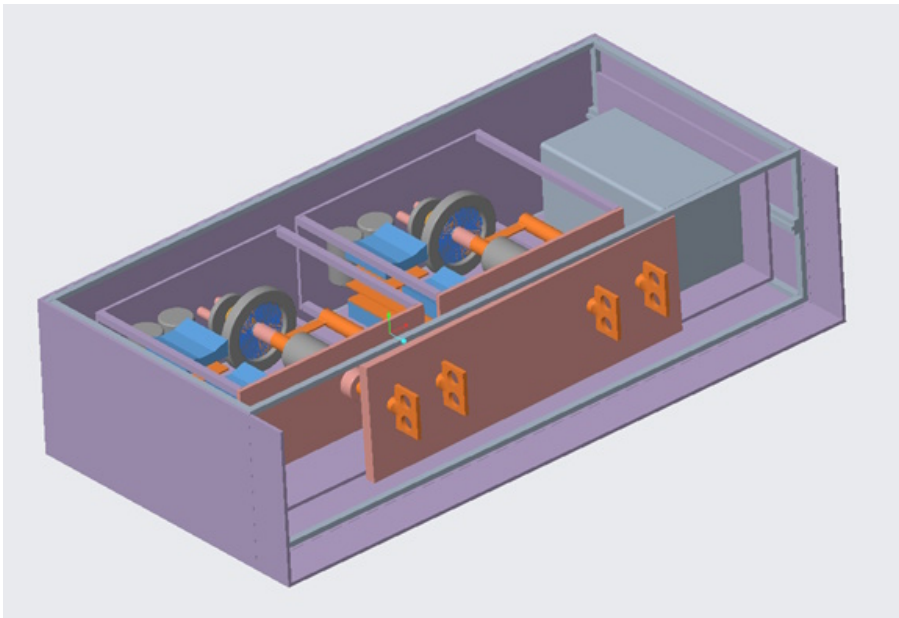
3D Switch Gear Drawer Layout for Deck Mounted Switches
